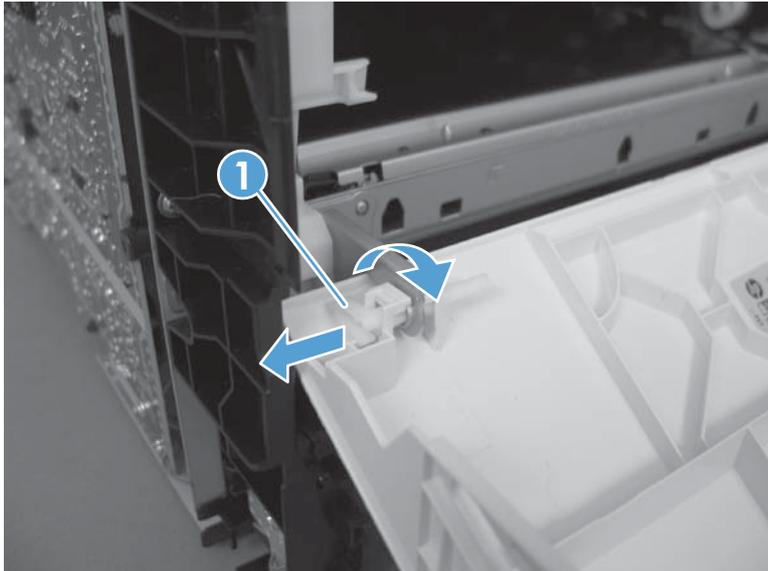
Remove the front door and front-lower cover (6 of 8)
